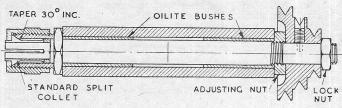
Hollow milling spindle with bronzebushed steel housing and ball thrust race
